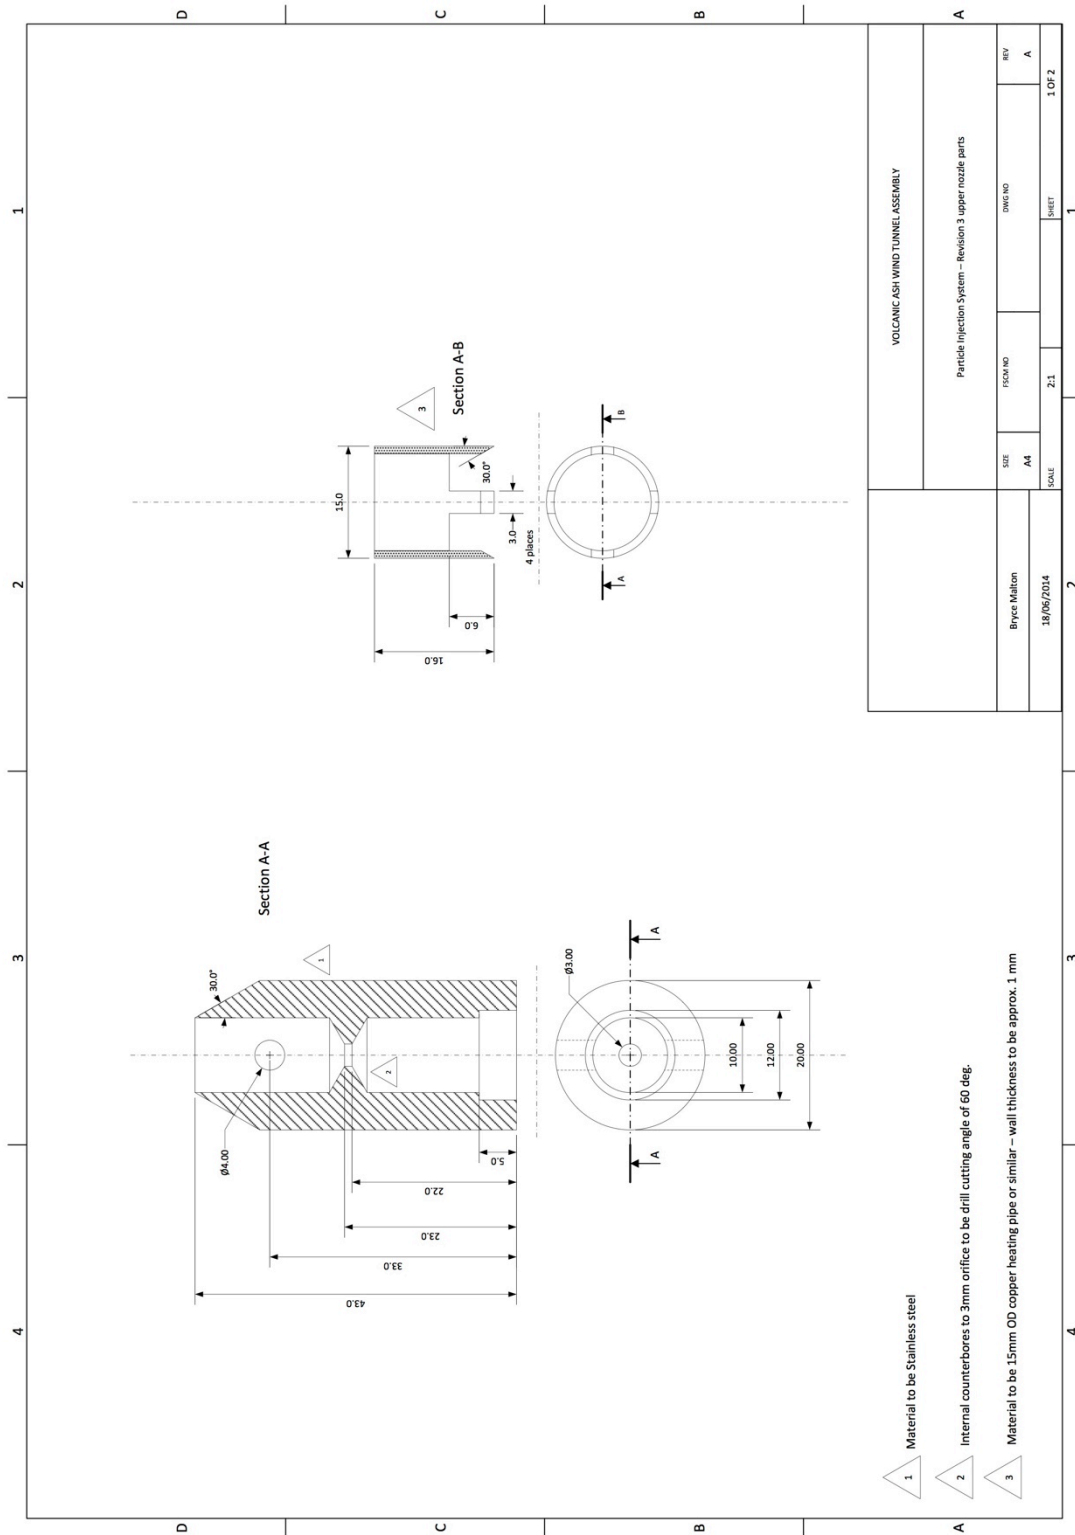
Revision 3 high-pressure air nozzle upper section piece parts.
